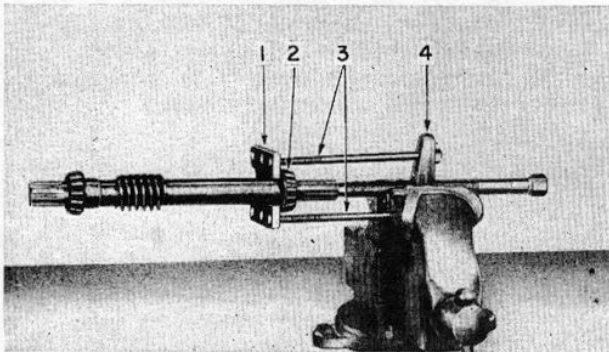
REMOVING BEARING FROM TRANSMISSION SHAFT
